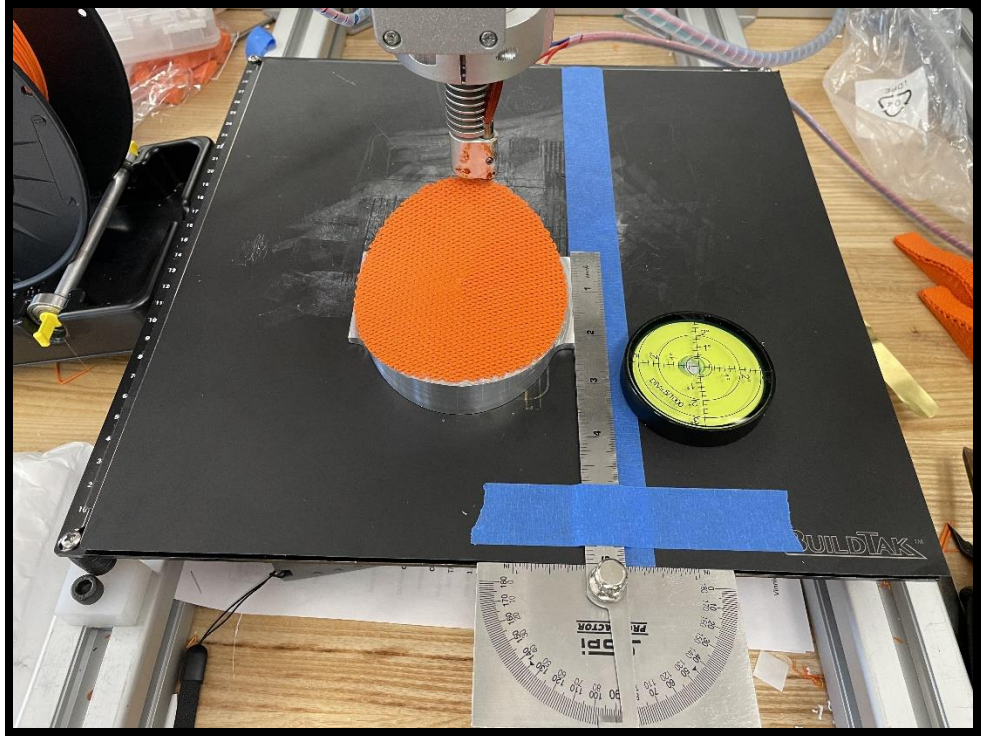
Skin or Shell Part Printed On Top of An Existing Structure
